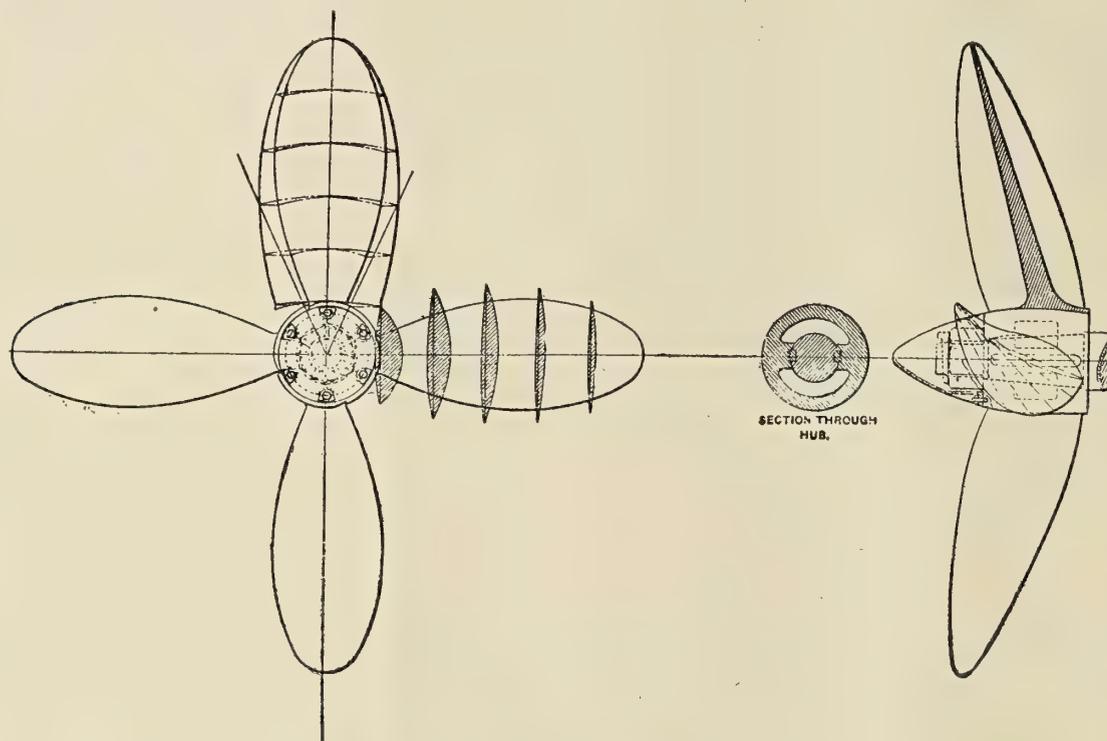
SCREW PROPELLER, BLADES CAST WITH HUB
